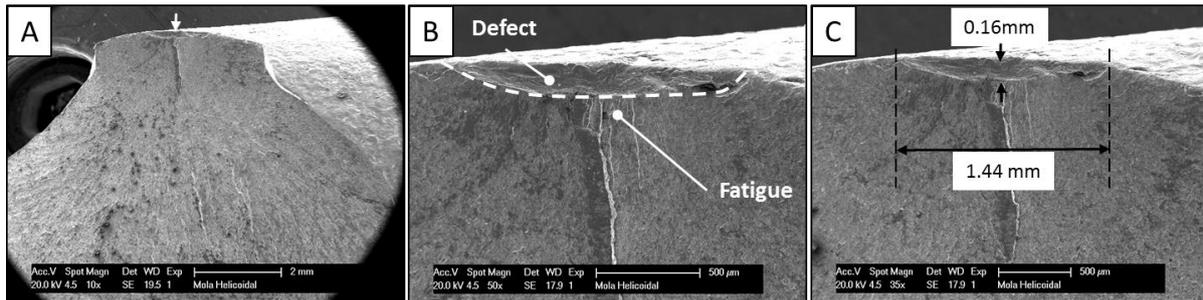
Fracture origin: (A) general view, (B) surface defect found at the fracture origin, (C) surface defect dimensions.
